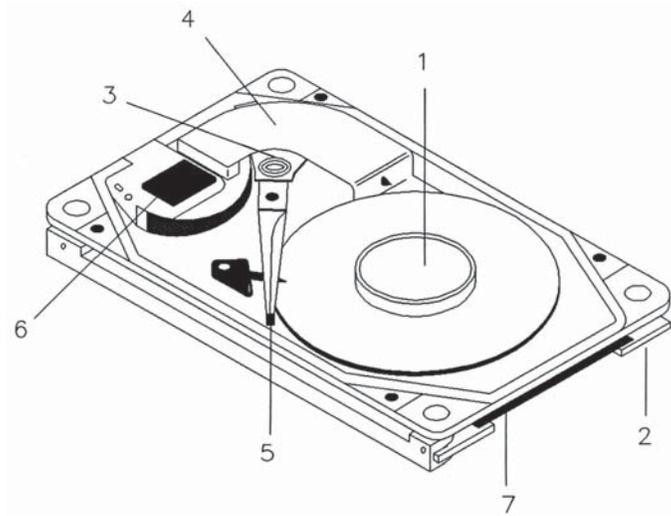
Computer hard disk drive (HDD) with a PM brushless motor: 1 — in-hub PM brushless motor mounted in 2.5-inch disk, 2 — integrated interface/drive controller, 3 — balanced moving-coil rotary actuator, 4 — actuator PM, 5 — read/write heads, 6 — read/write preamplifier, 7 — 44-pin connector.
